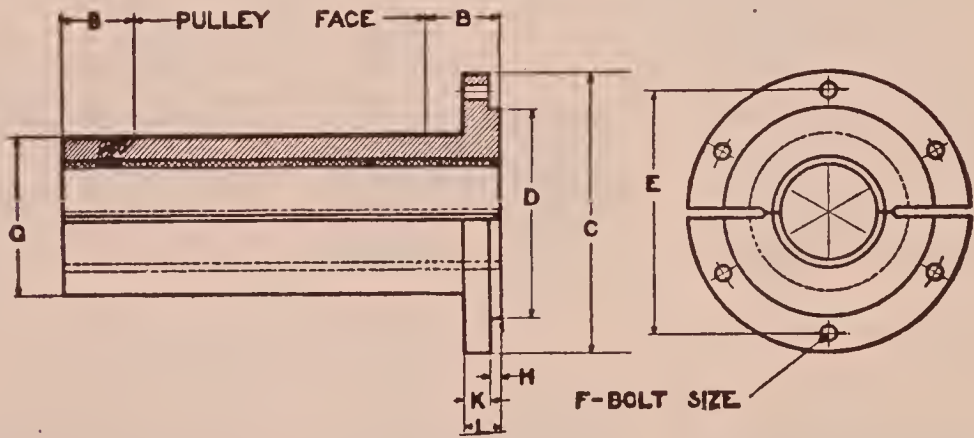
A half-sectional drawing of a babbitted sleeve for a clutch.
